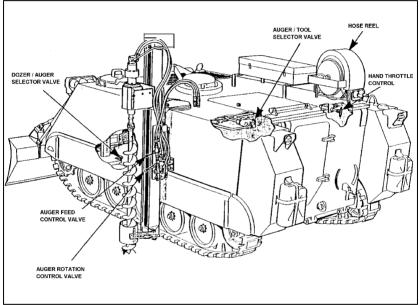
Location of M113 A2 APC Hydraulic Control Valves
